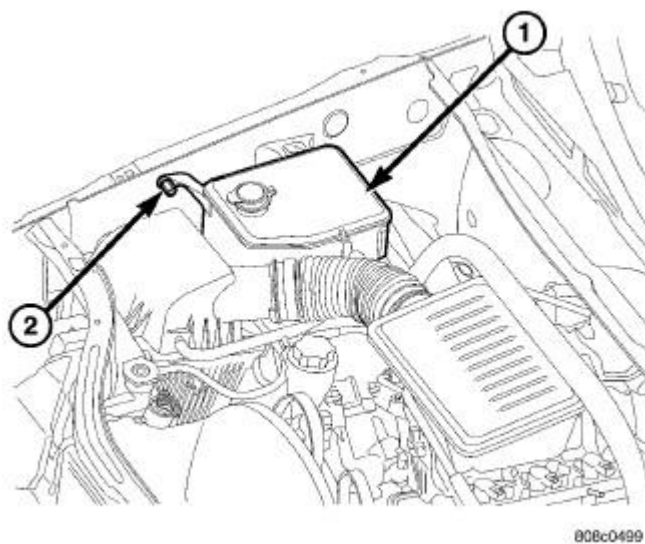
Coolant Reservoir/Overflow Tank - Gas
